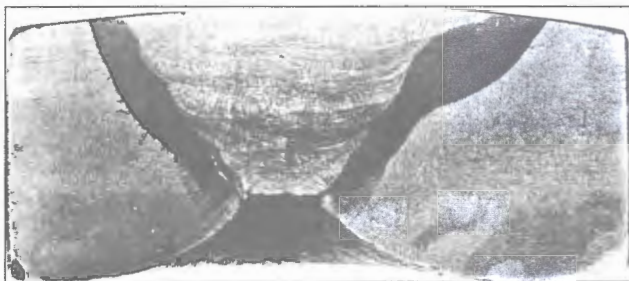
Macrosection of the joint produced by filling up of a process hole in the bottom of steel 20KhN4FA by manual arc welding
